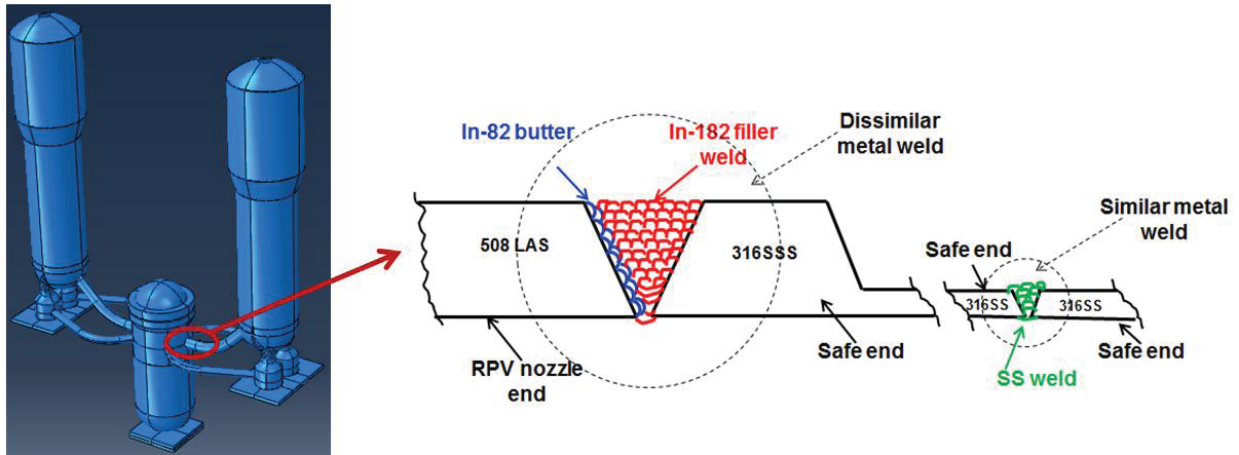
1 Computer modeling schematic of a PWR showing different metals and welds used in the reactor pressure vessel, RCS pipe, and their joints.
